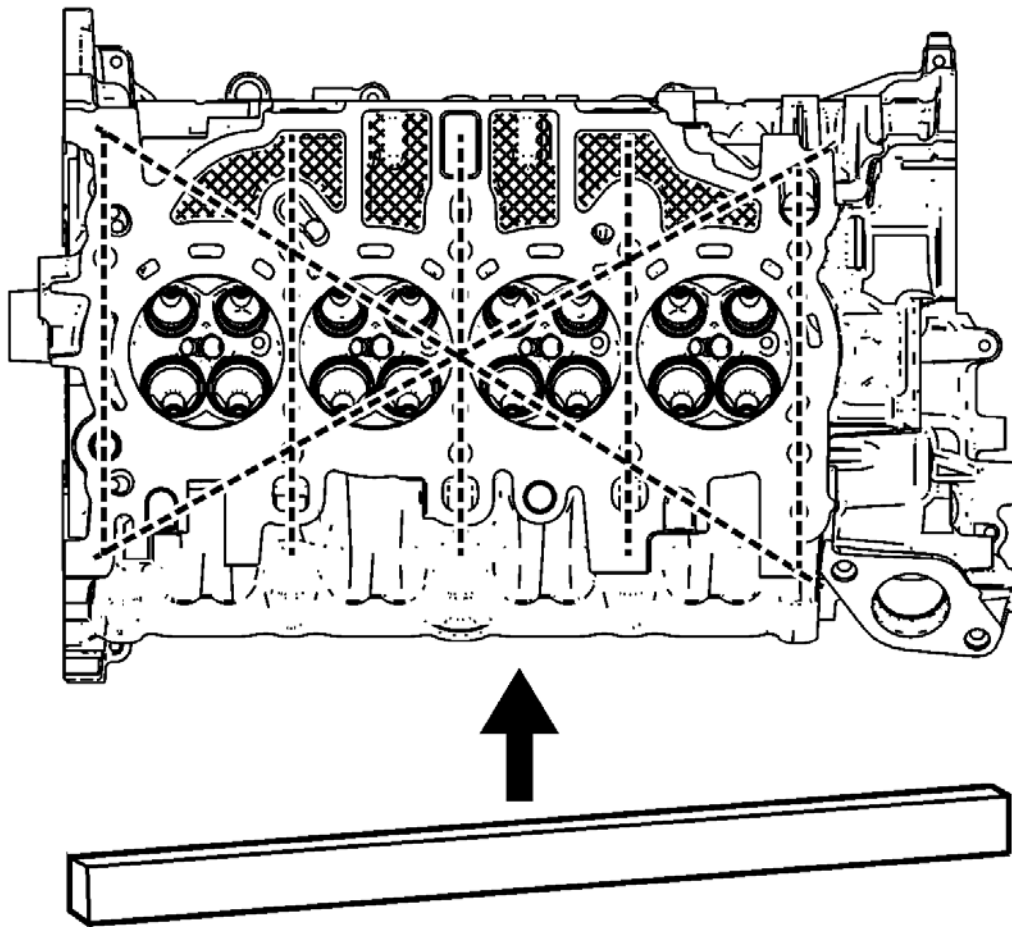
Inspecting Cylinder Head Deck Surface For Flatness
